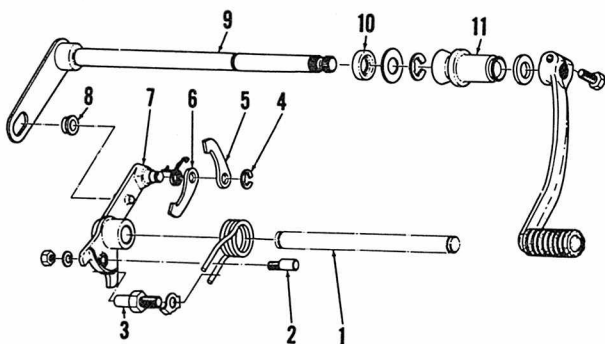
Exploded view of shifting linkage used on model R5.
